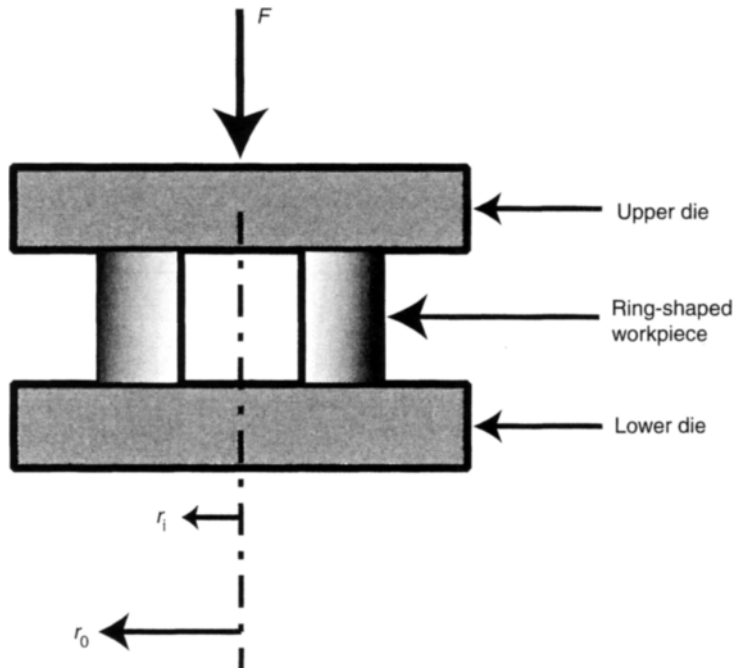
Illustration of the open die compression forging of an axisymmetric shaped ring.
